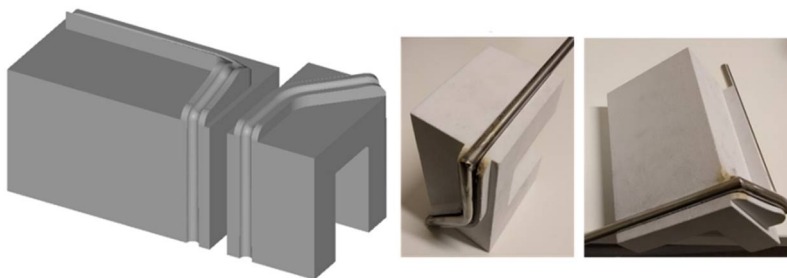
3D printed guides for use in the creation of formed stainless steel tubes.
